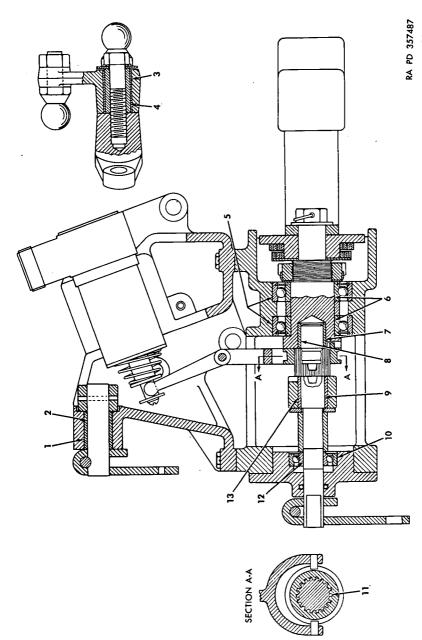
Serviceability standards points of measurement for Gunner's shifter control and control-link tever assembly.
